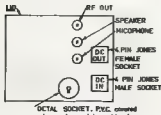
CONTROL BOX LAYOUT—BUILT IN EDDYSTONE BOX 7 1/4" x 4 1/2" x 2".
